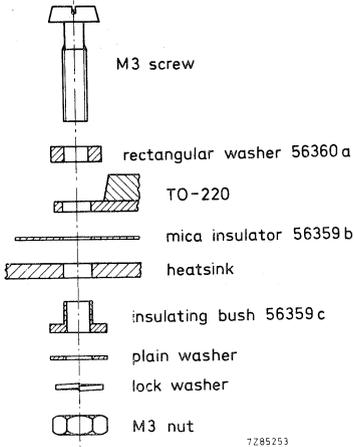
Insulated screw mounting with rectangular washer. Known as a "bottom mounting".
